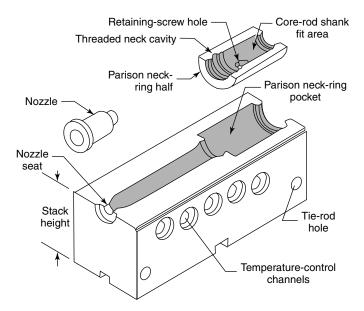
Exploded view of one-half of a parison-mold cavity, with nozzle and neck-ring details.
